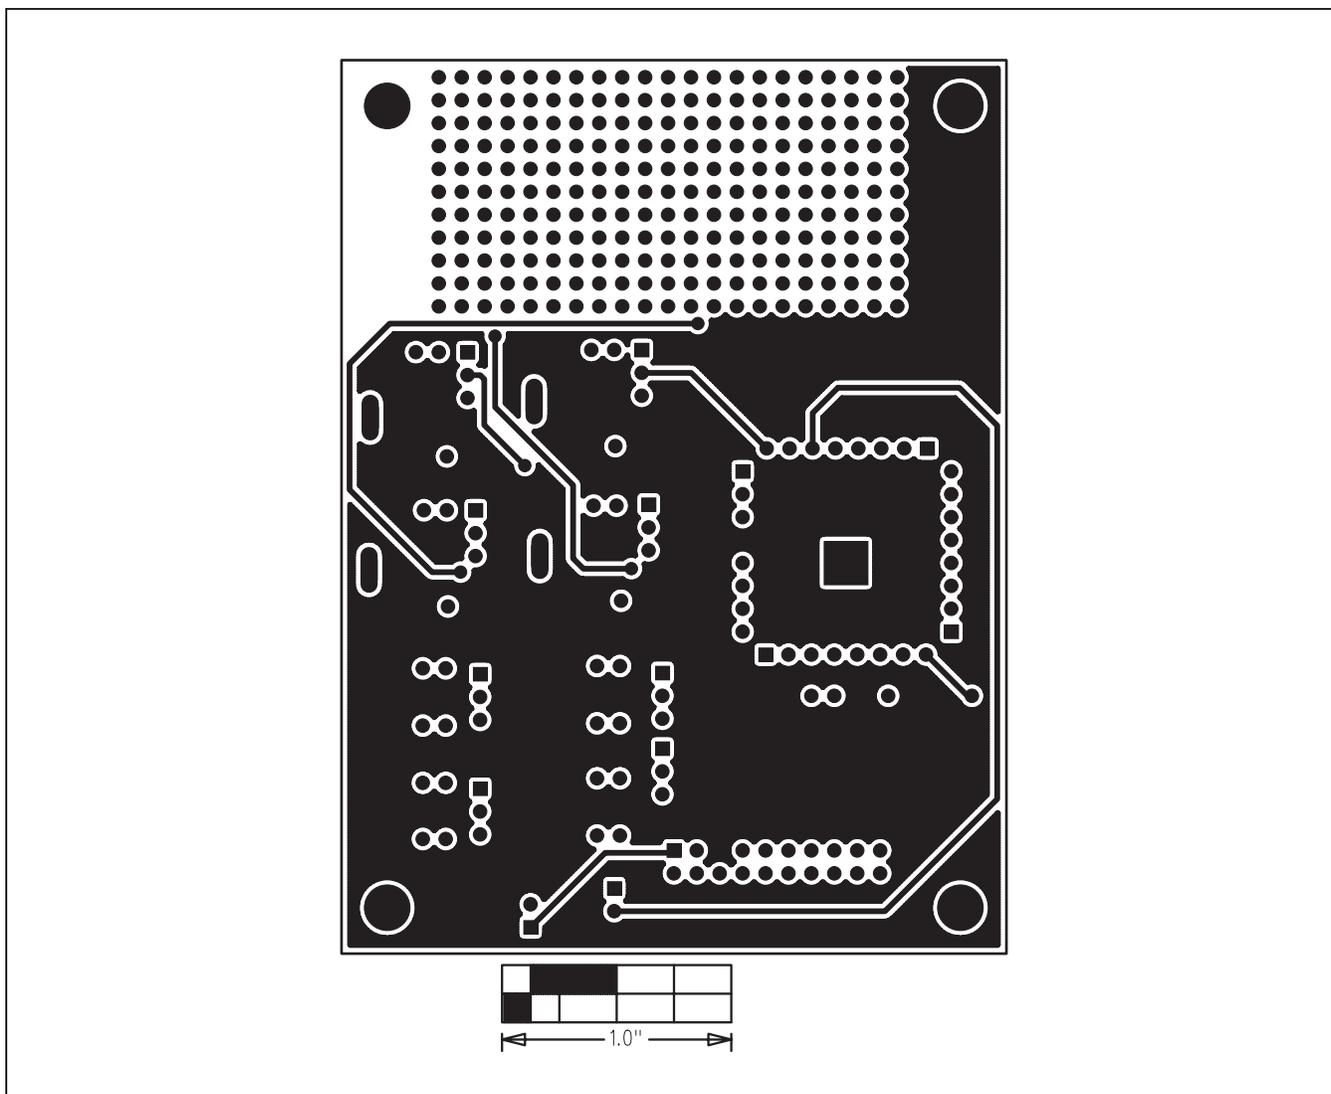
MAX6870 EV Kit PC Board Layout—Solder Side
